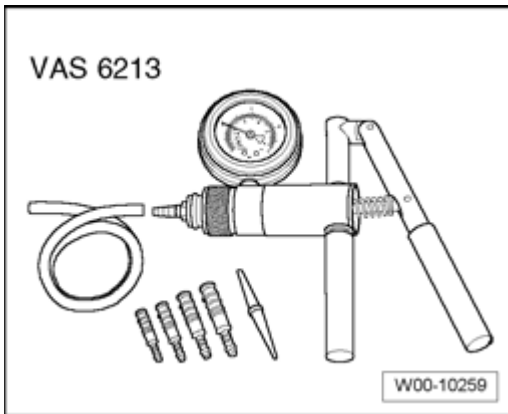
Identifying Hand Vacuum Pump VAS 6213
